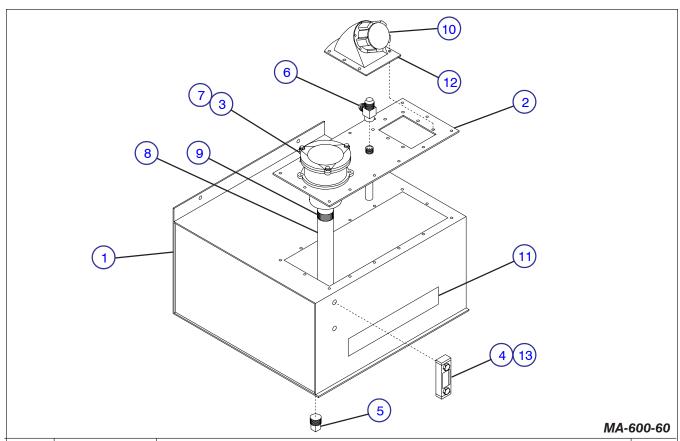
FUEL TANK ASSEMBLY - Diesel Engines
